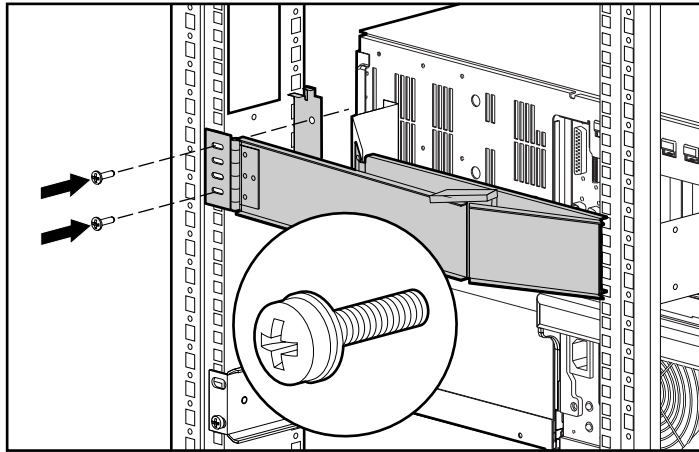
Attaching the cable management arm to the rear brace of the rack
